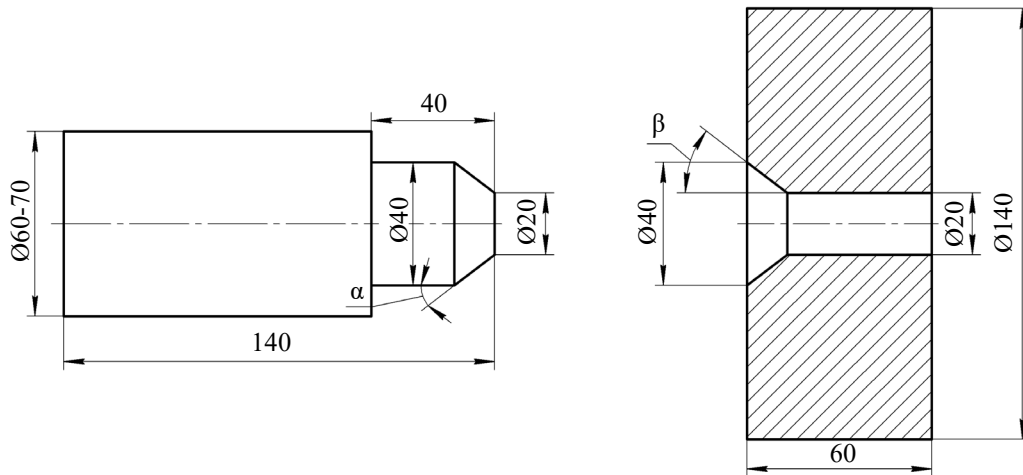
Fitting unit model: α — fitting cone angle; β — housing cone angle
